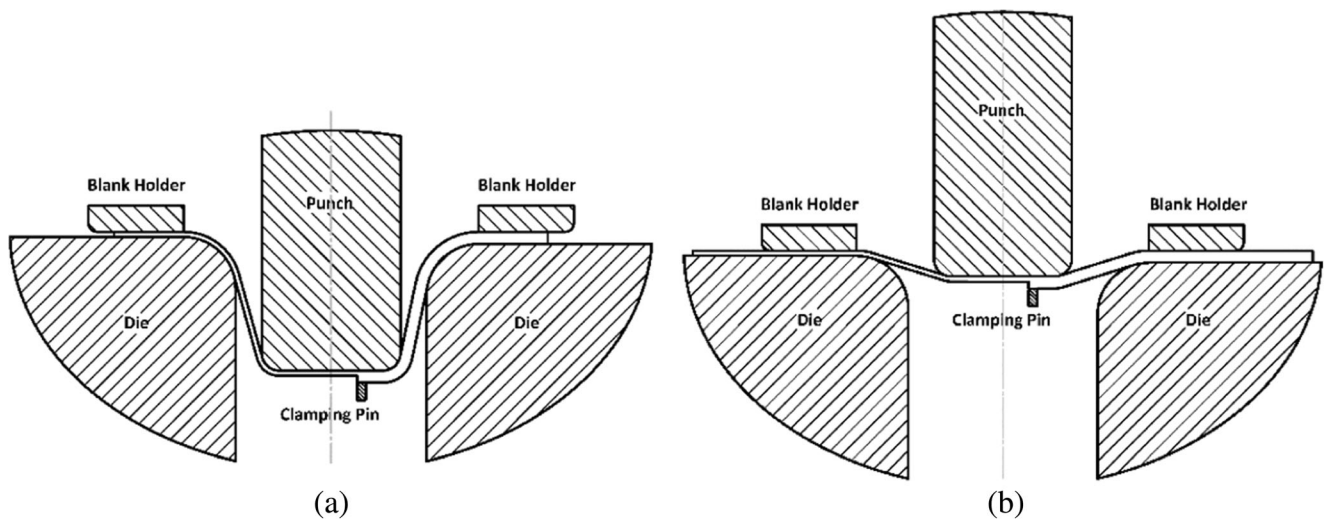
Blank holding configurations. a Case 1: The flange is completely under binder with decreasing blank holding area. b Case 2: The flange is partially constrained with a constant blank holding area
